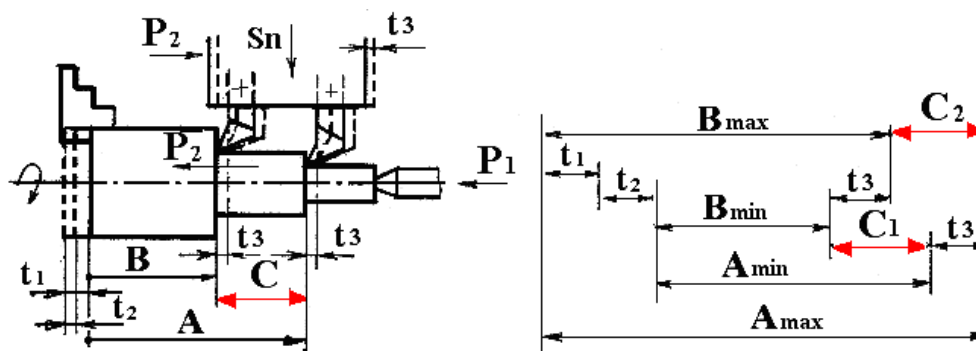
Occurrence of compensating errors while mechanically machining the parts:
